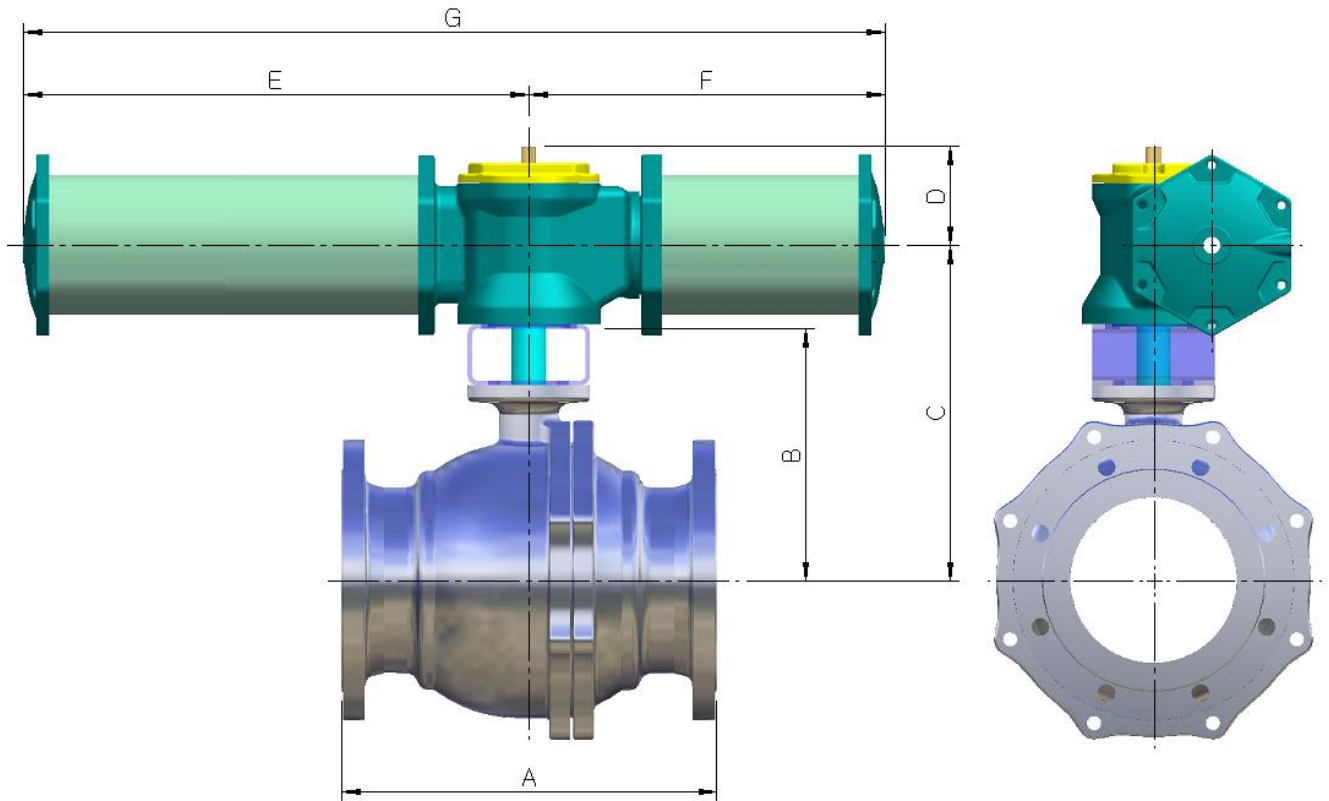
Ball Valve & Cylinder Actuator Assembly Dimension
